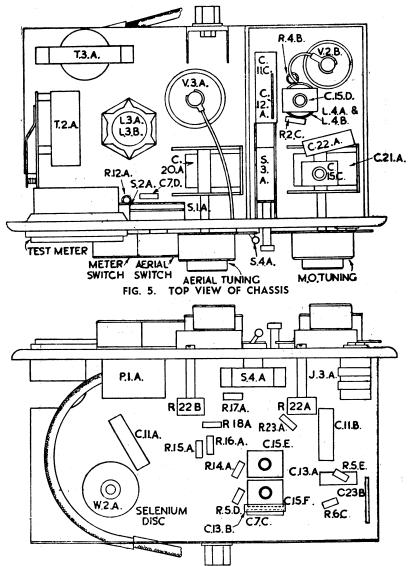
UNDERSIDE VIEW OF CHASSIS
